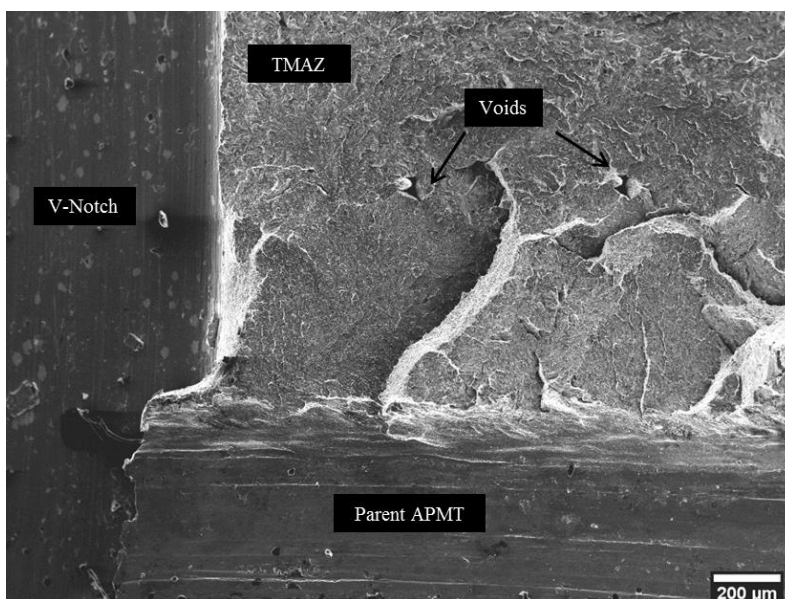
SEM fractograph of the Charpy v-notch impact fracture surface of W30 as welded sample.
